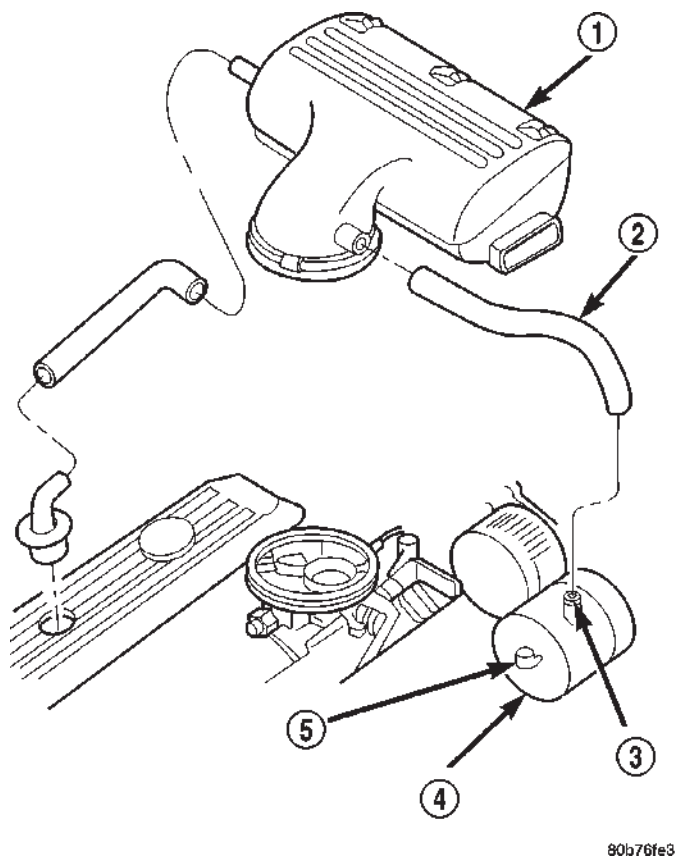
Air Inlet for Air Pump—5.9L HDC Engine
